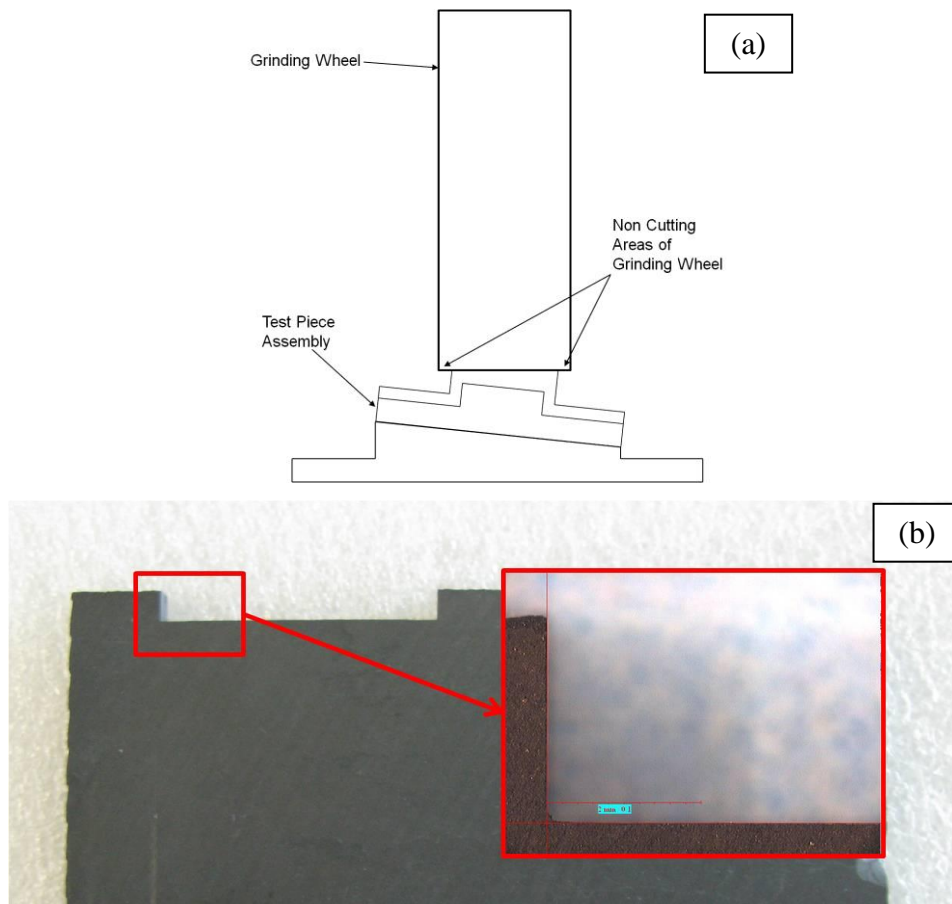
Images of Radial Wear Procedure; (a) Grinding wheel overhang proving non cutting edges of grinding wheel radius used as reference in wear measurement, (b) Graphite wear coupon with wheel cut profile to measure radial wheel wear.
